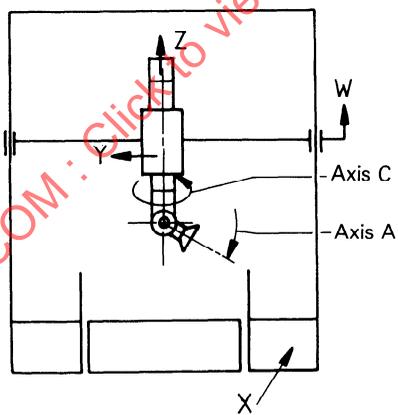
Type 2: Machine with one milling head on a movable cross-rail and an additional milling head swivelling on axes C and A
